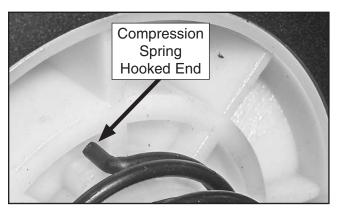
Hooked end of compression spring locked into driver gear shoulder.
